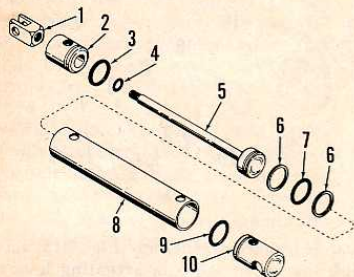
Exploded view of model F30 hydraulic lift cylinder used on some tractors.
